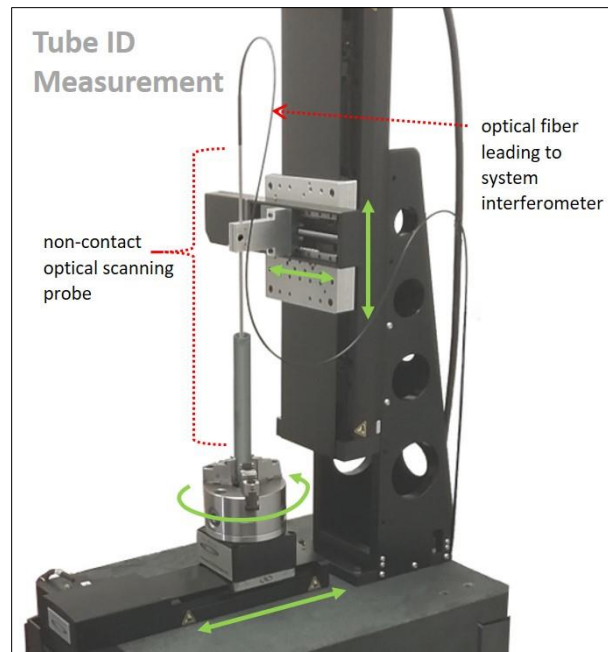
NOVACAM TUBEINSPECT system with a 4-axis inspection station
